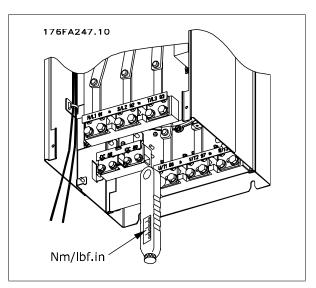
Always use a torque wrench to tighten the bolts.
